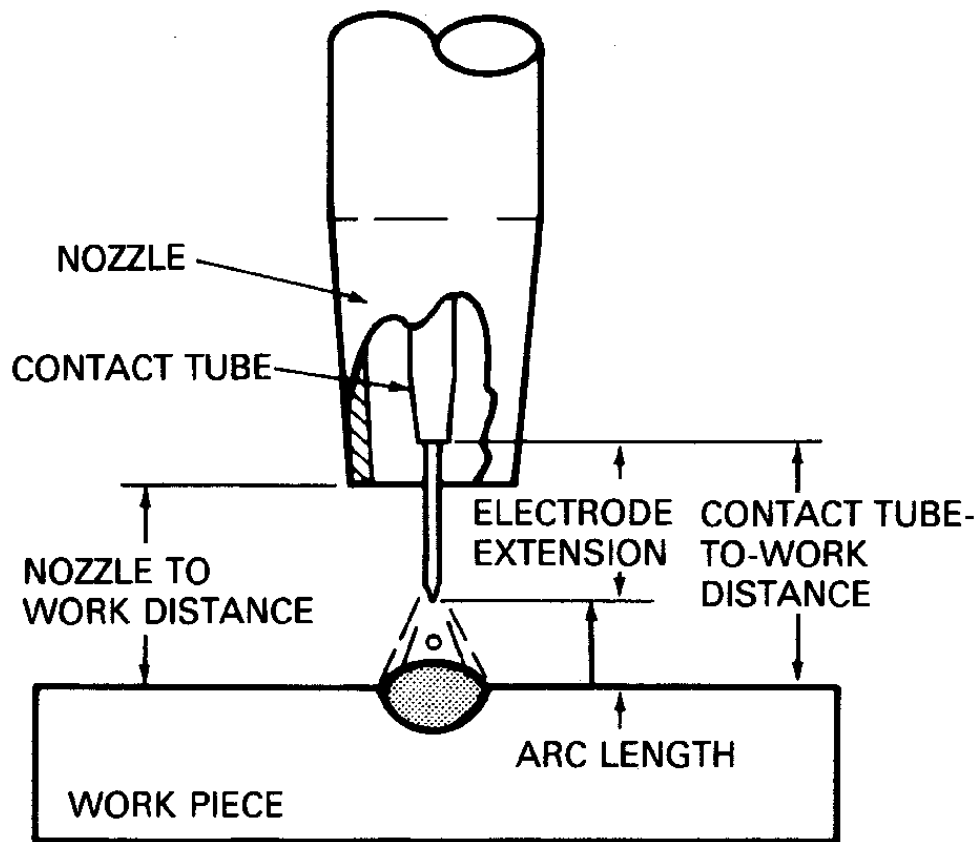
Gas metal arc welding terminology ^[2]
